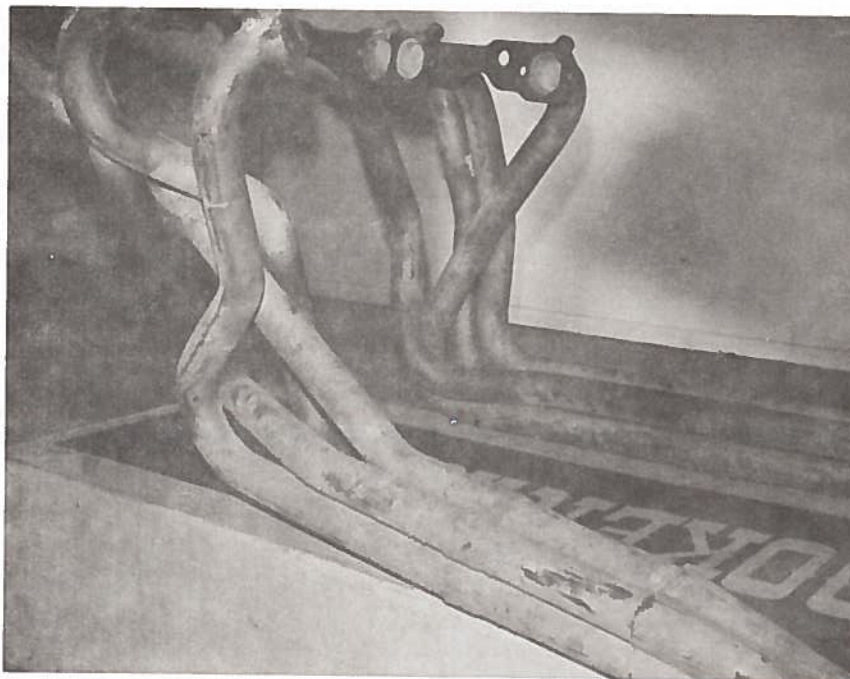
HOOKER TUNED EXHAUST HEADERS-TUBE BUNDLE ARRANGEMENT
